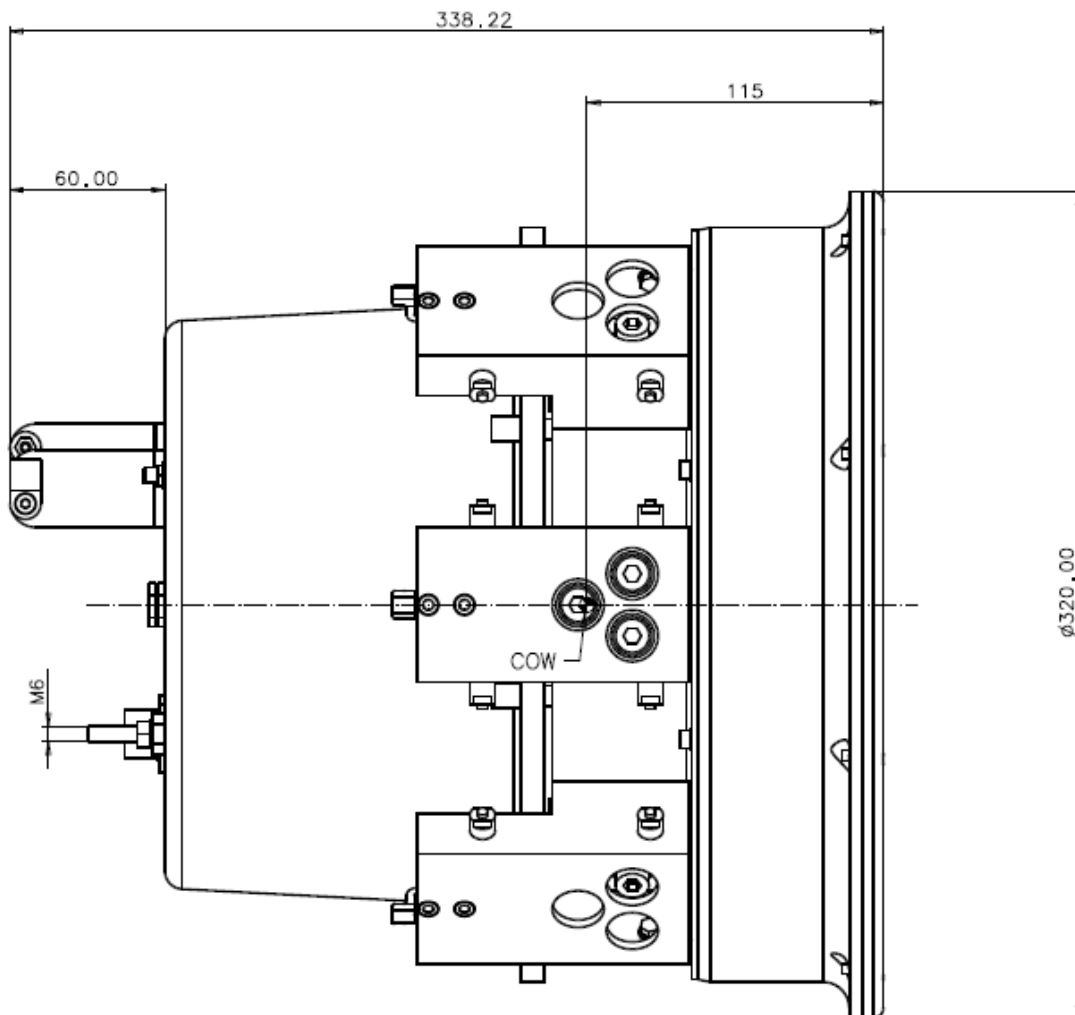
Mechanical dimensions of R&S®AC025DP in mm.
